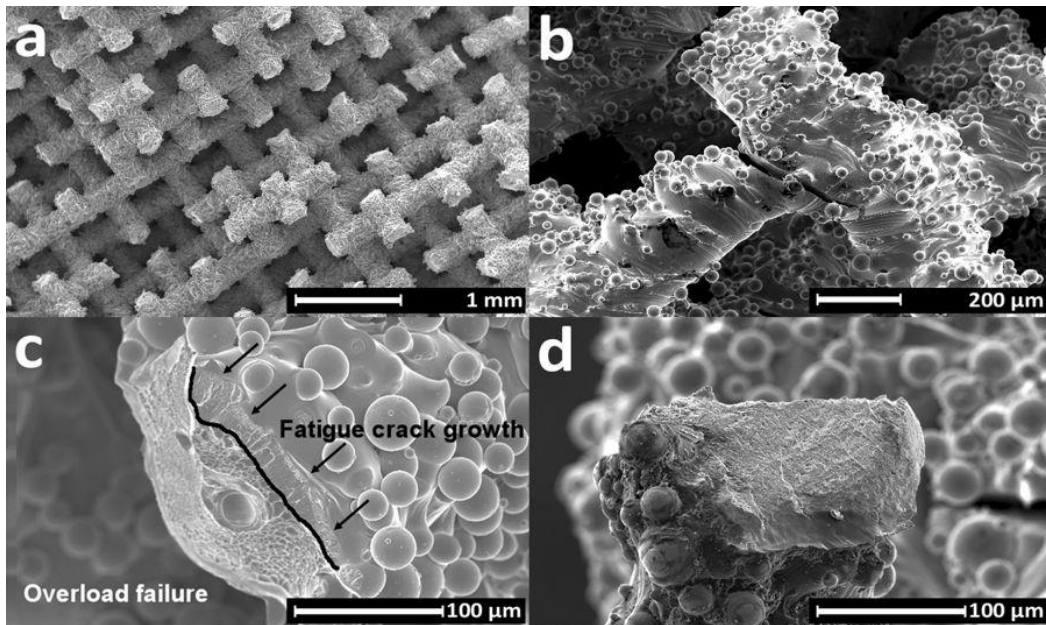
29 SEM images of fracture surface after fatigue tests: (a) Samples mostly fracture close to the nodes. (b) A crack, which initiated and propagated close to a node for tension-compression fatigue. (c) The fracture surface in tension-tension fatigue showed signs of both fatigue crack propagation (upper right) and ductile overload fracture (lower left). (d) The fracture surface after compression-compression fatigue failure [162].
